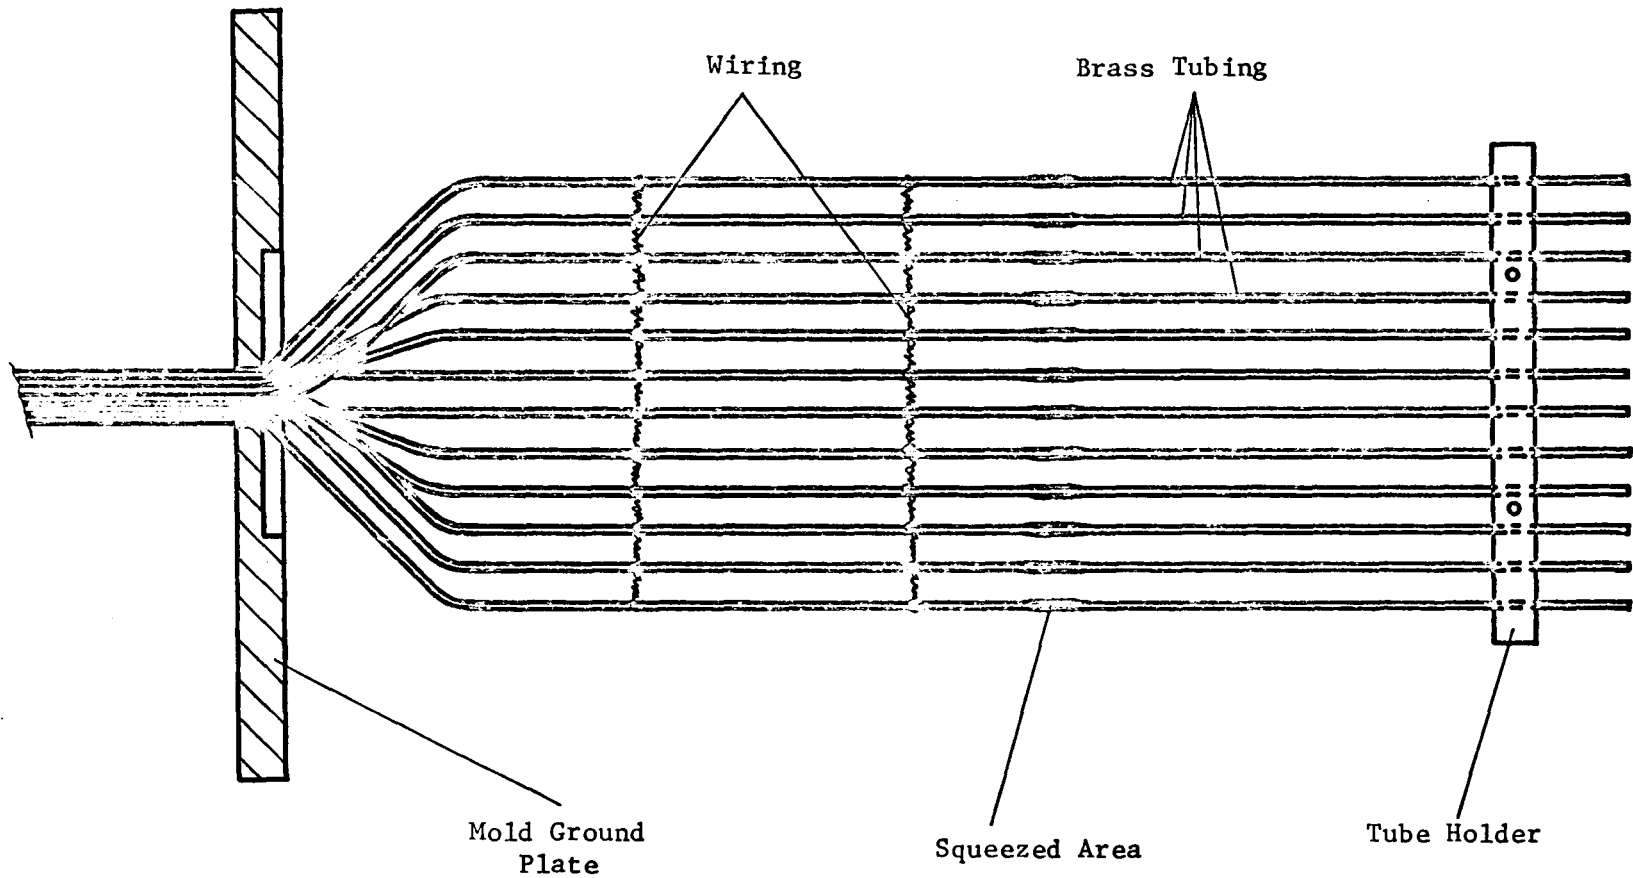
Pressure tubing wired and ready to be mounted on pressure side part of the blade mold
